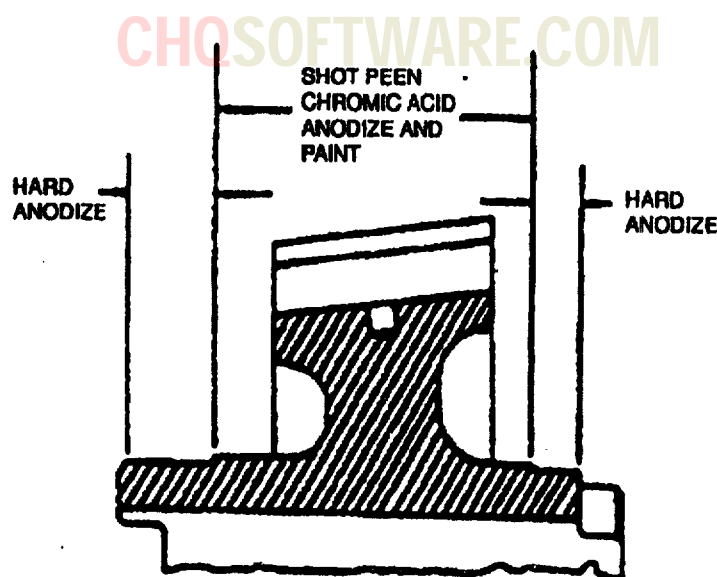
Compressor Front Rotor Shaft - Plating Area.
